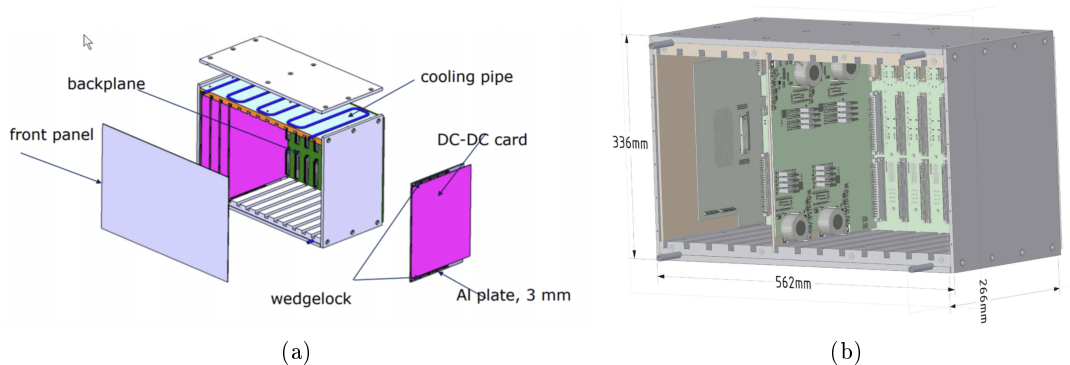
The simplified view of the PP2 crate (a) with its dimensions (b) [146].
